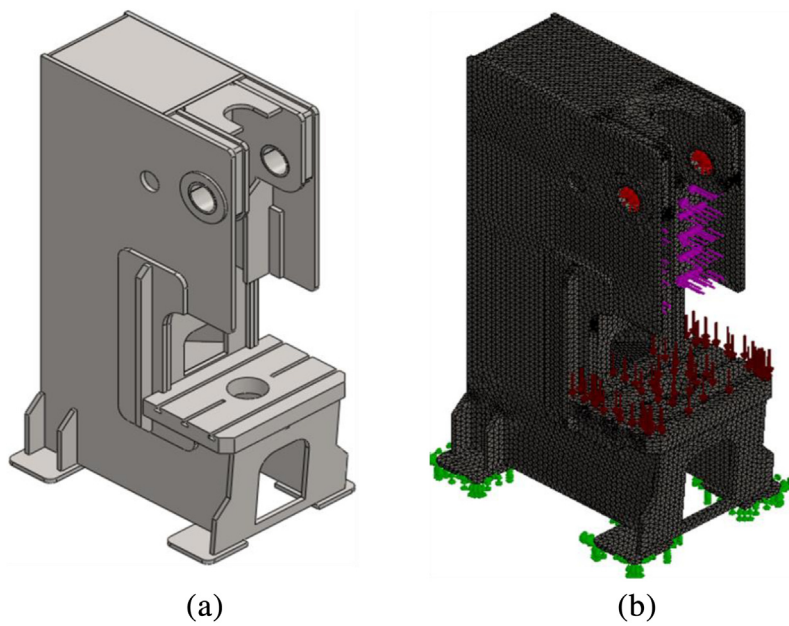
Main body assembly: (a) 3D CAD model, (b) Meshed model with loads and fixtures.
